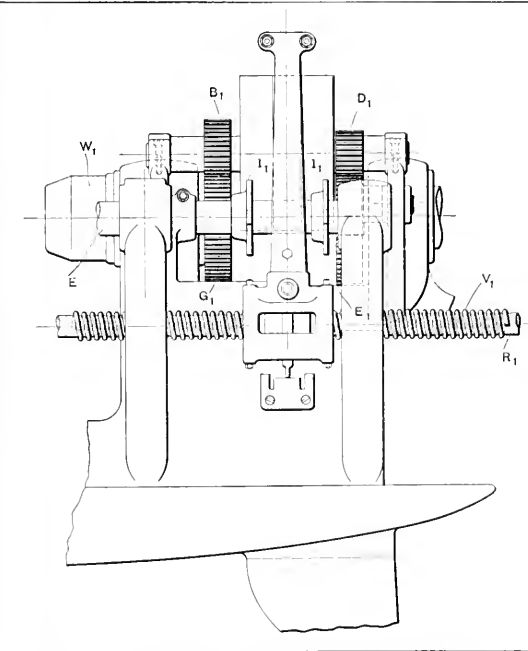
Rear Elevation of Work-spindle End of Machine showing Drive and Belt Shifting Arrangement
